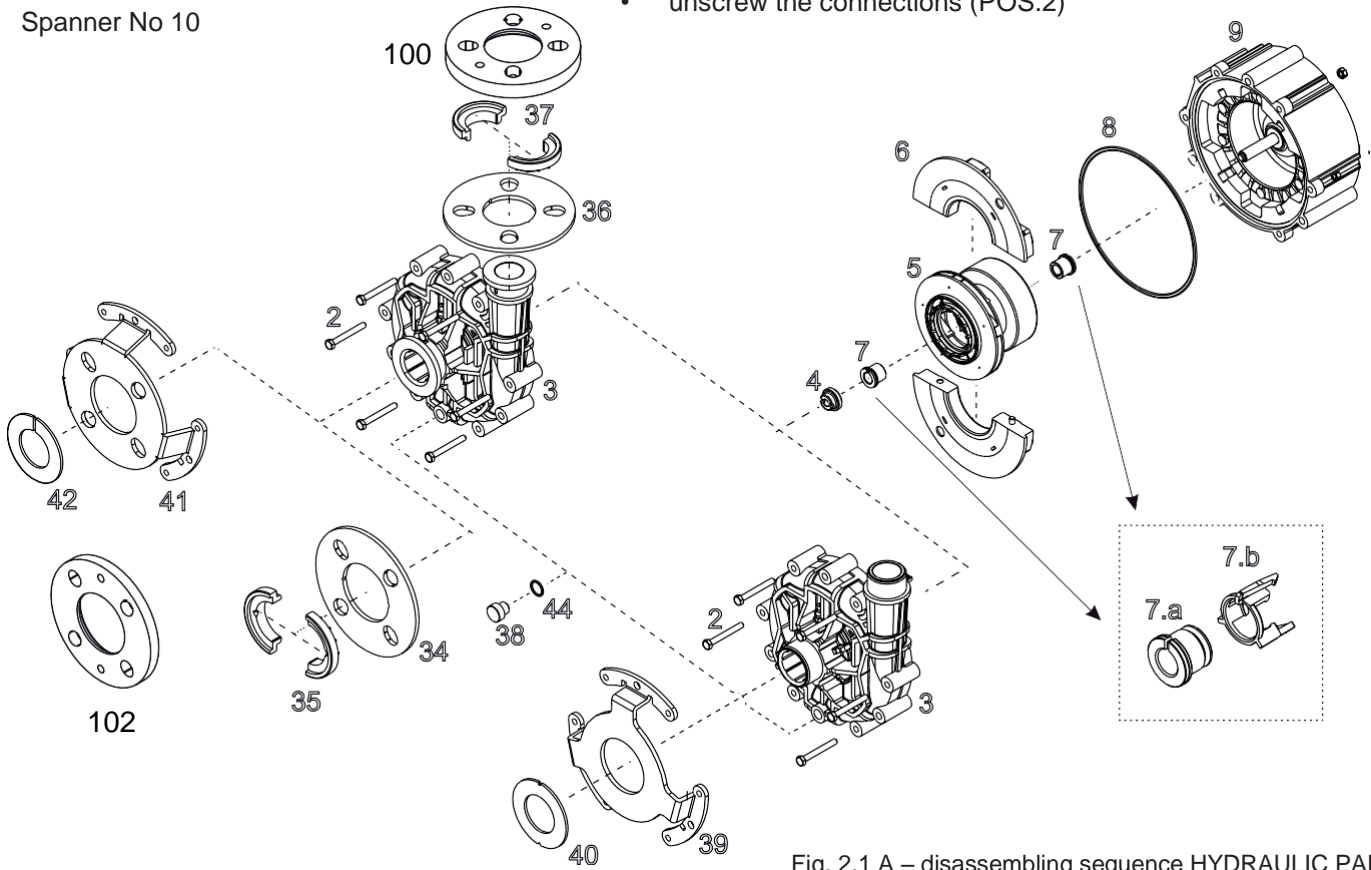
A – disassembling sequence HYDRAULIC PARTS
